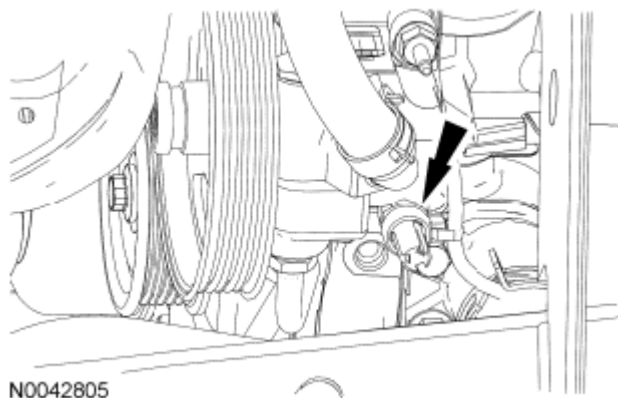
Identifying Wiring Harness Retainer And Power Steering Pump Stud Bolt
